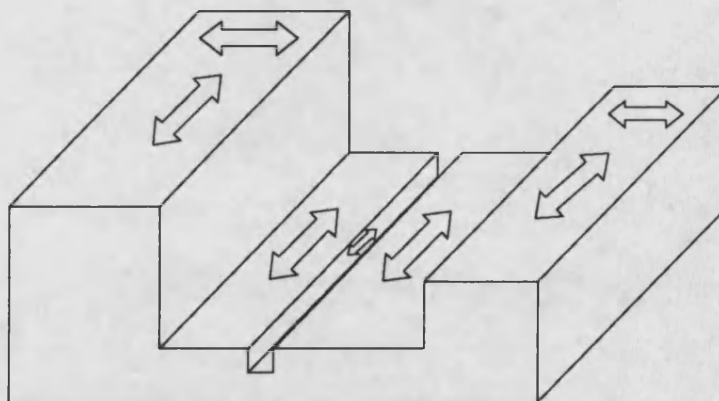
C: Arrows shows machining direction either using vertical or horizontal milling machine.
